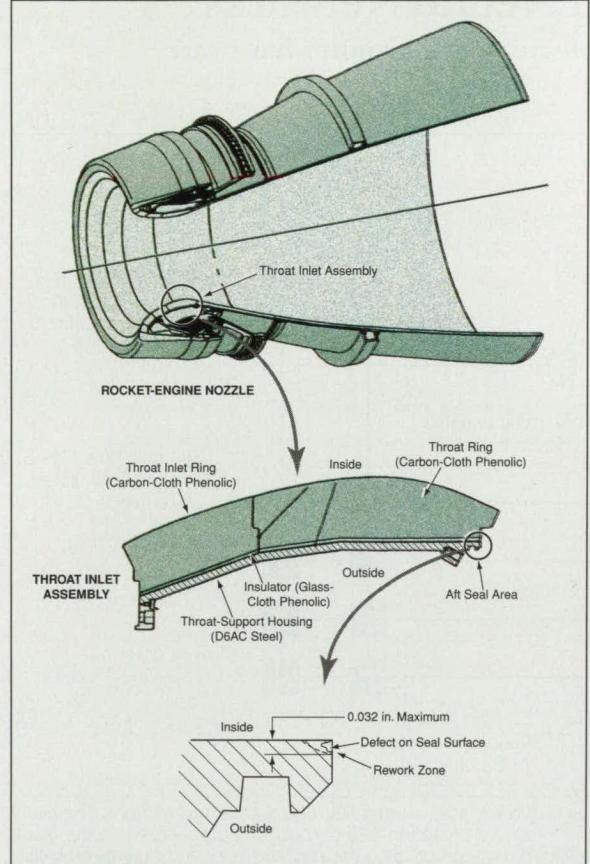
Material Containing a Defect must be removed from the inside edge of the seal surface. The depth of removal must not exceed 0.032 in. (0.81 mm).
